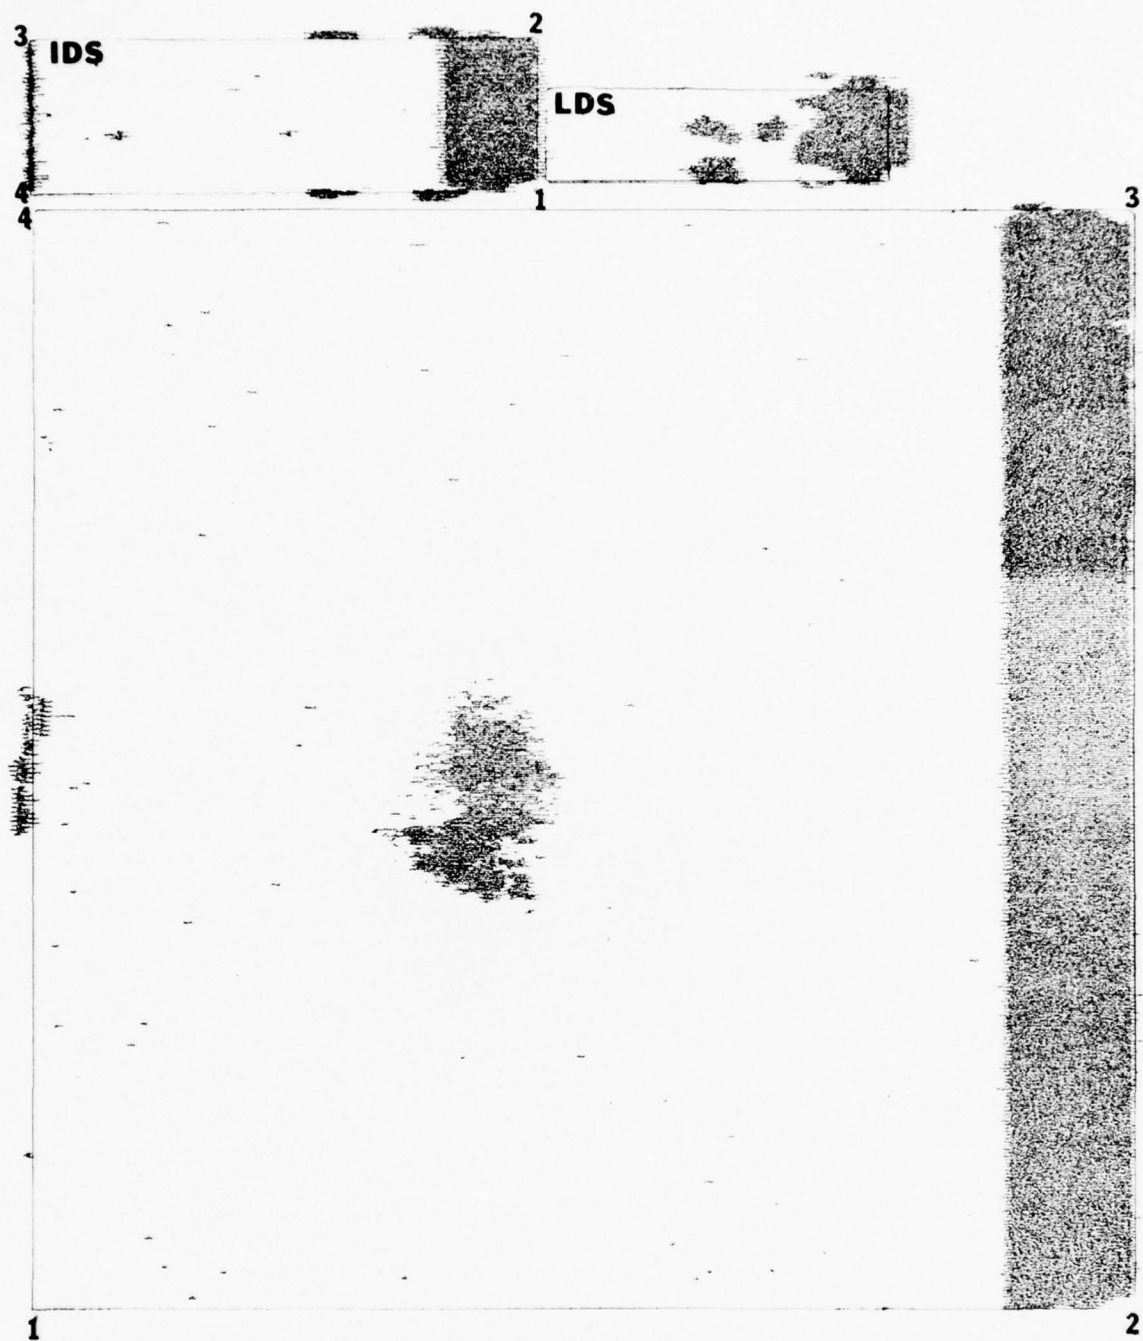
C-scan Recording of 45 MHz, 11° Shear Wave Inspection of NC-203A After Machining.
